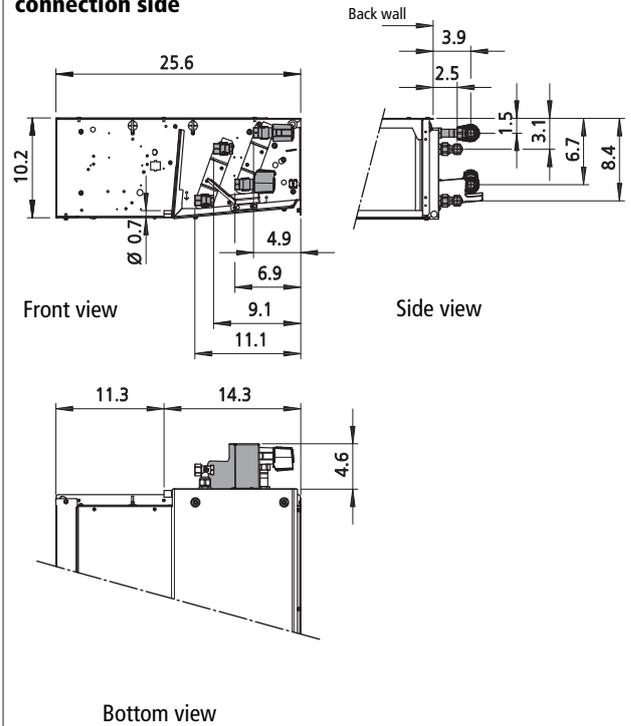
Dimensions 2-way valve kit (wall-mounted version)
